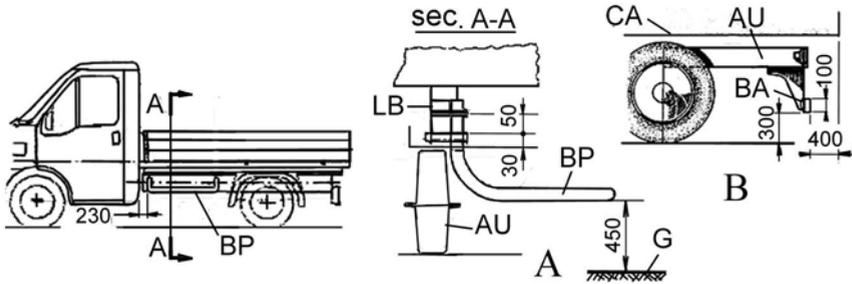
Examples of side (A) and rear (B) protection for other road users. CA) pick-up bed; AU) chassis; BA) side protection bar; BP) rear protection bar; LB) underbody rail; G) ground.
